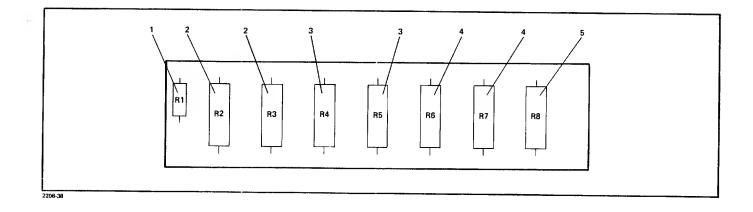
Test Point Assembly (A12A1), Parts Location Diagram
